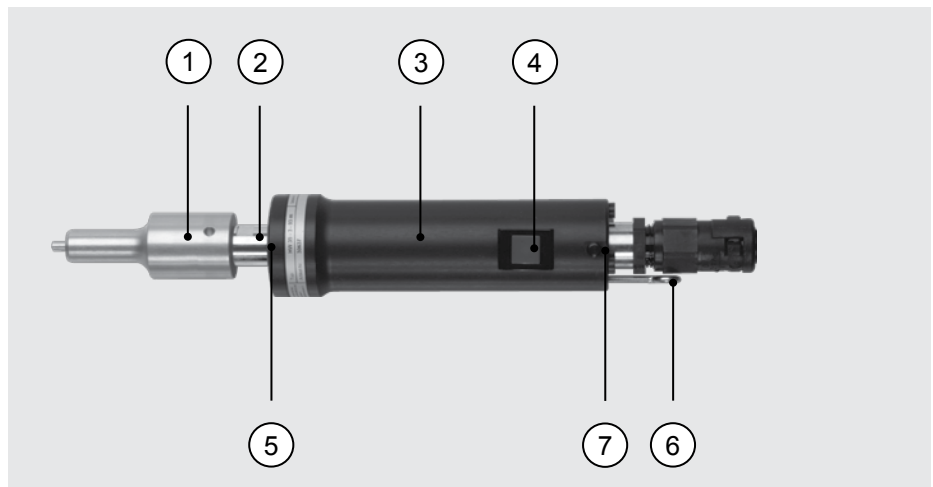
HW35-4 ultrasonic hand welding unit
